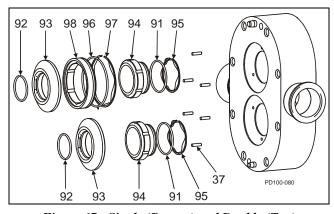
Single (Bottom) and Double (Top) Mechanical Seal Exploded View
